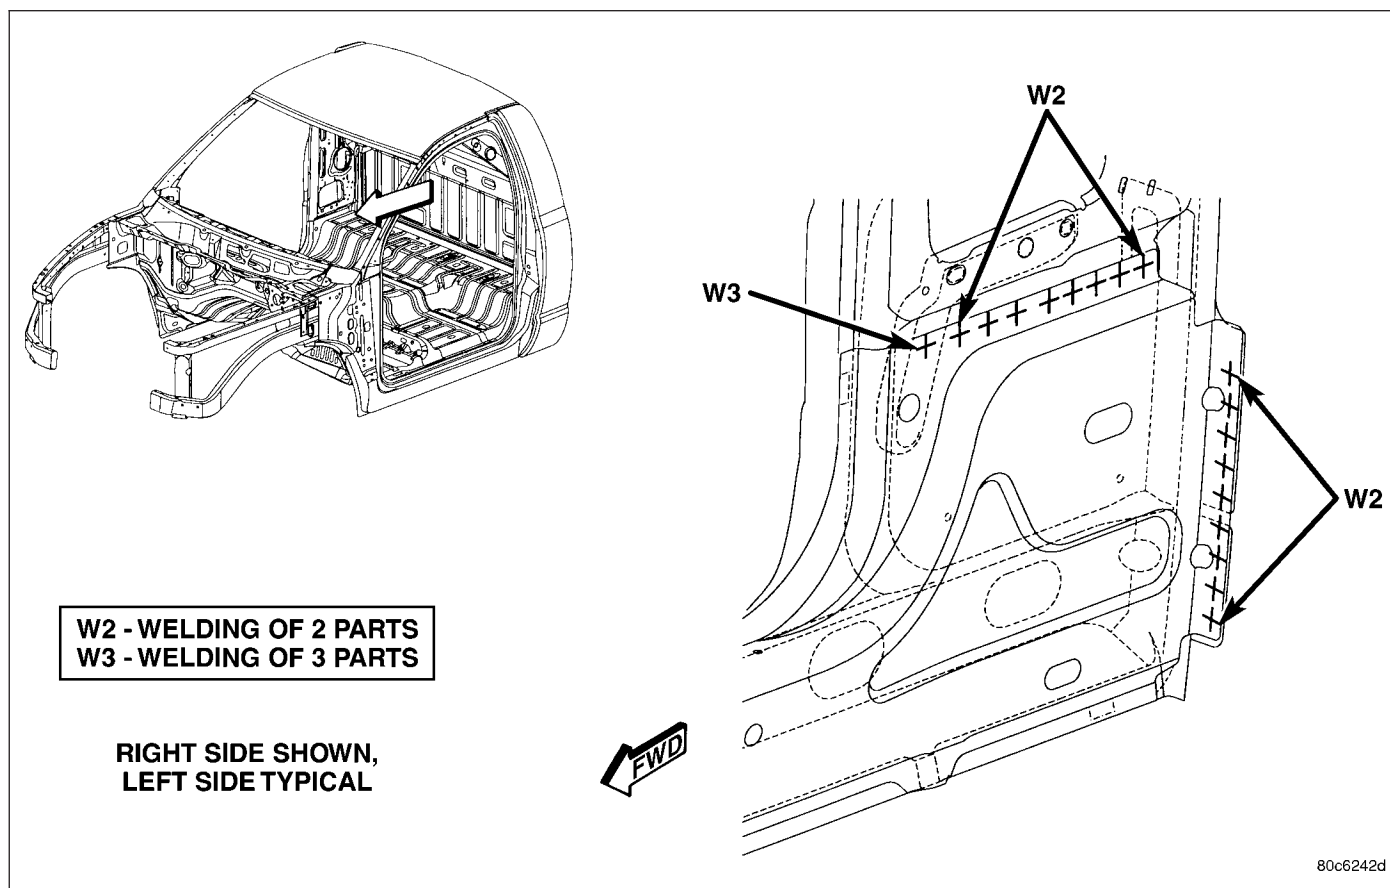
SEAT BELT RETRACTOR PLATE - STANDARD CAB
